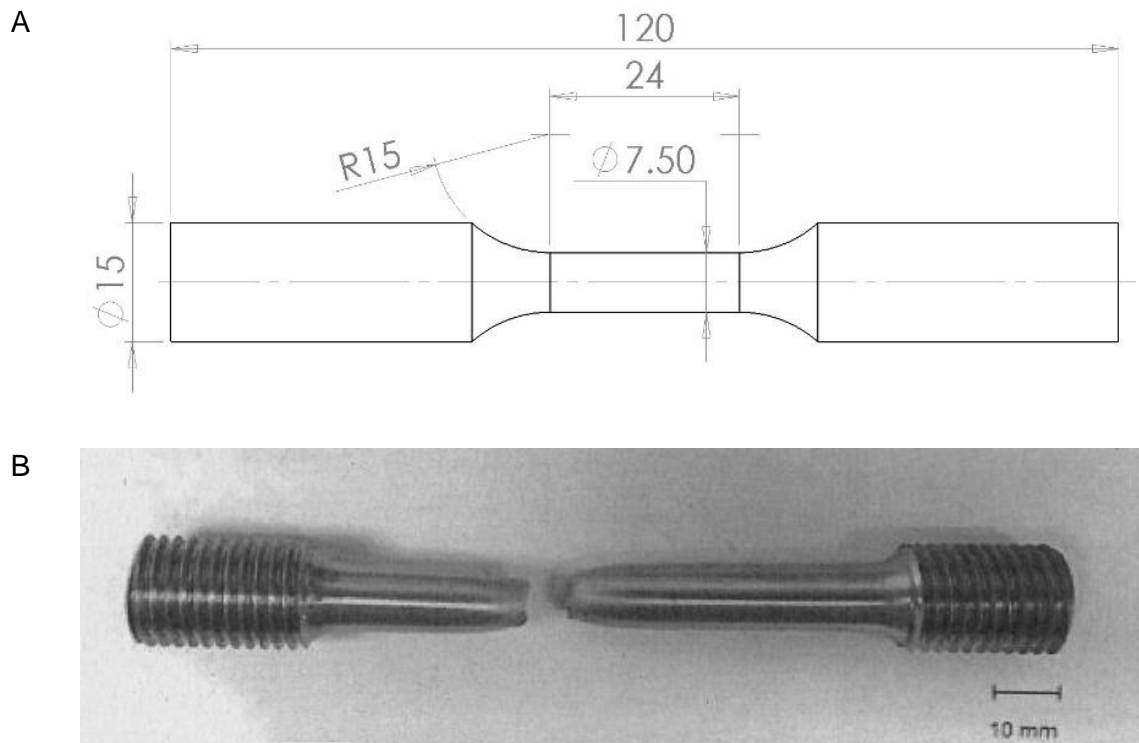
A) Cylindrical dog-bone tensile specimen dimensions. B) The tensile specimens were prepared and tested by Frazer-Nash Consultancy. Note that the same specimen geometry was also used for fully reversed strain controlled cyclic loading tests.
